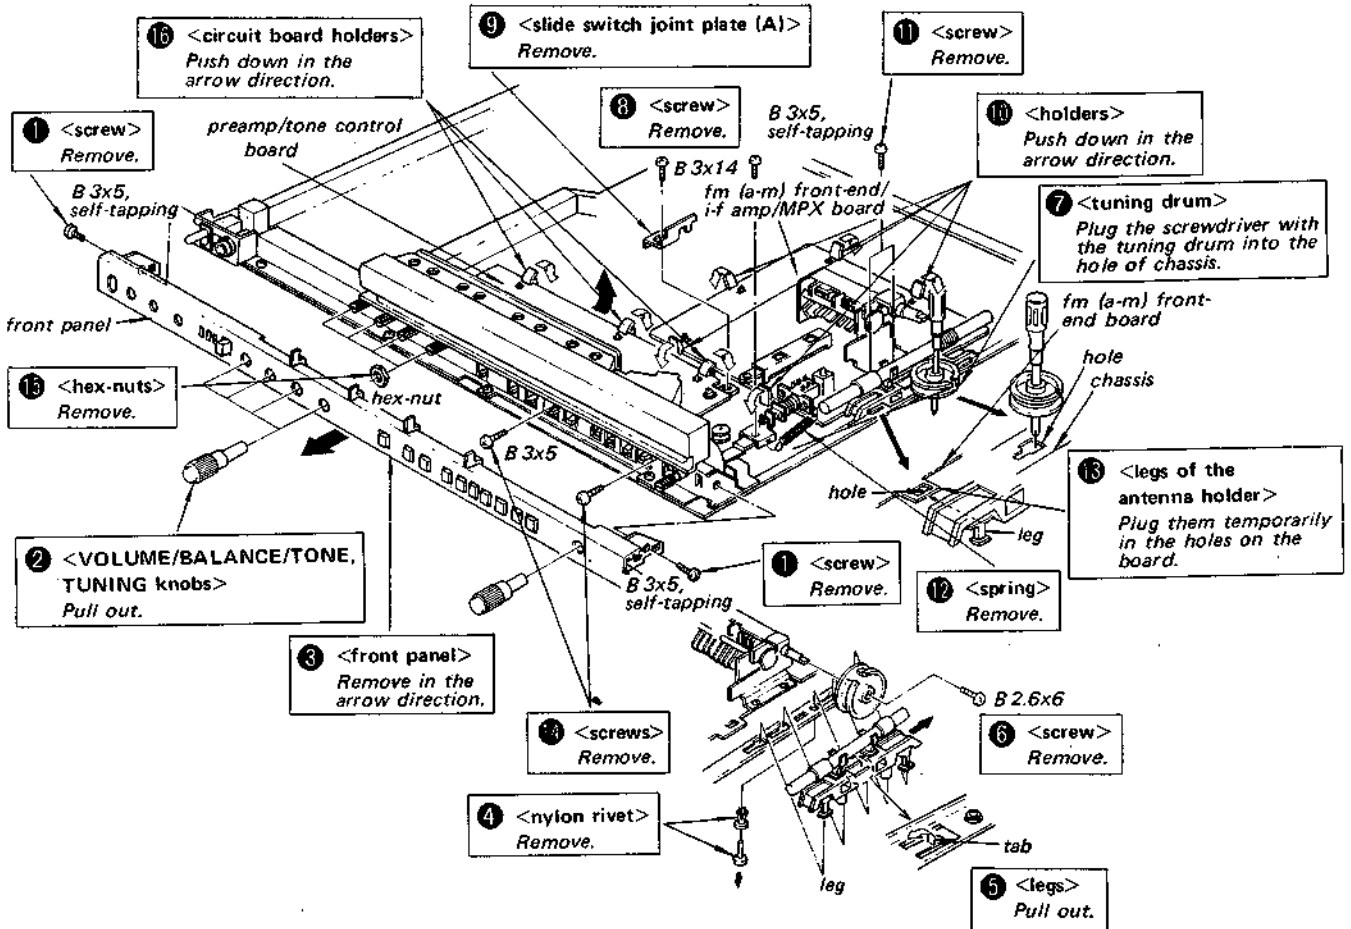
Front panel, fm (a-m) front-end board and preamp/tone control board removal.
